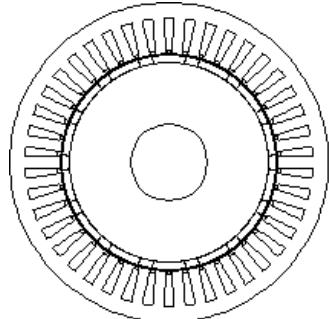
Capture of the 7 pole pair 42 slot integer machine
